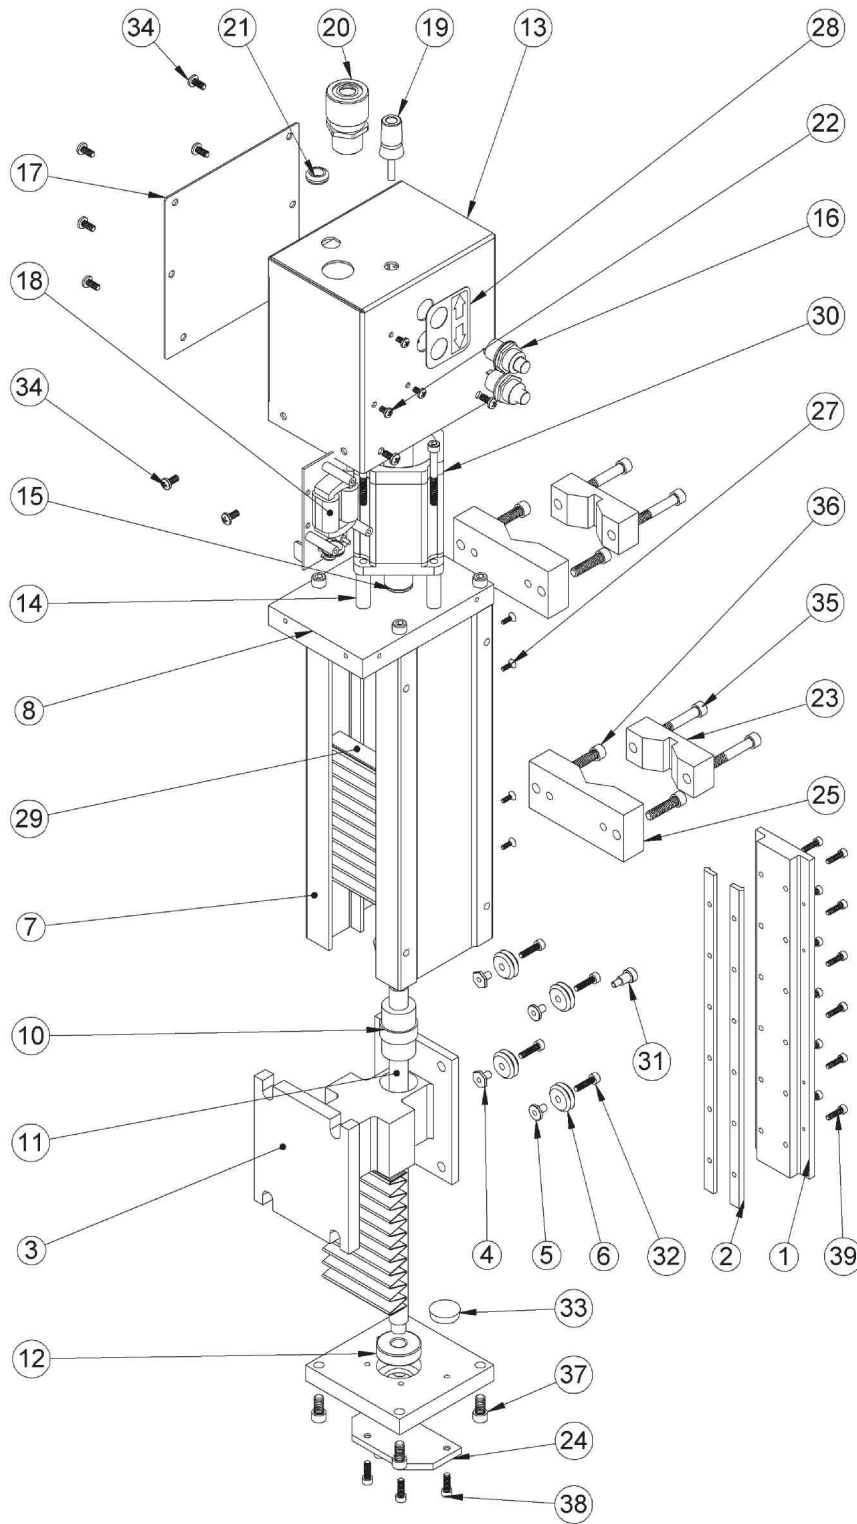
AVC-5 STANDARD DRIVE ASSEMBLY EXPLODED VIEW
